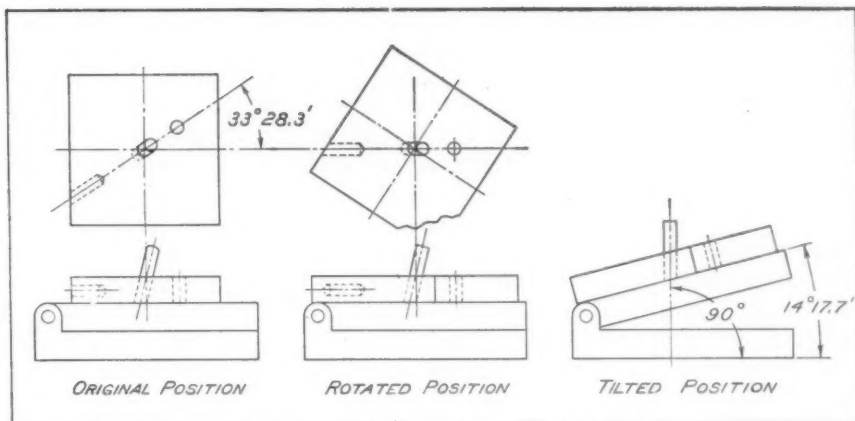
Machining and Inspection of Hole O for Rod to be Inclined from the Vertical at Compound Angle C are Facilitated by Three Construction Pin Holes
